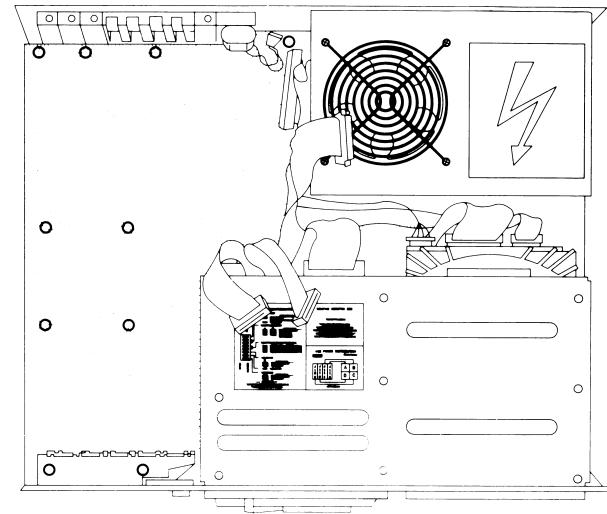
Placement of Retaining Screws on the 12-MHz COMPAQ DESKPRO 286 System Board.
